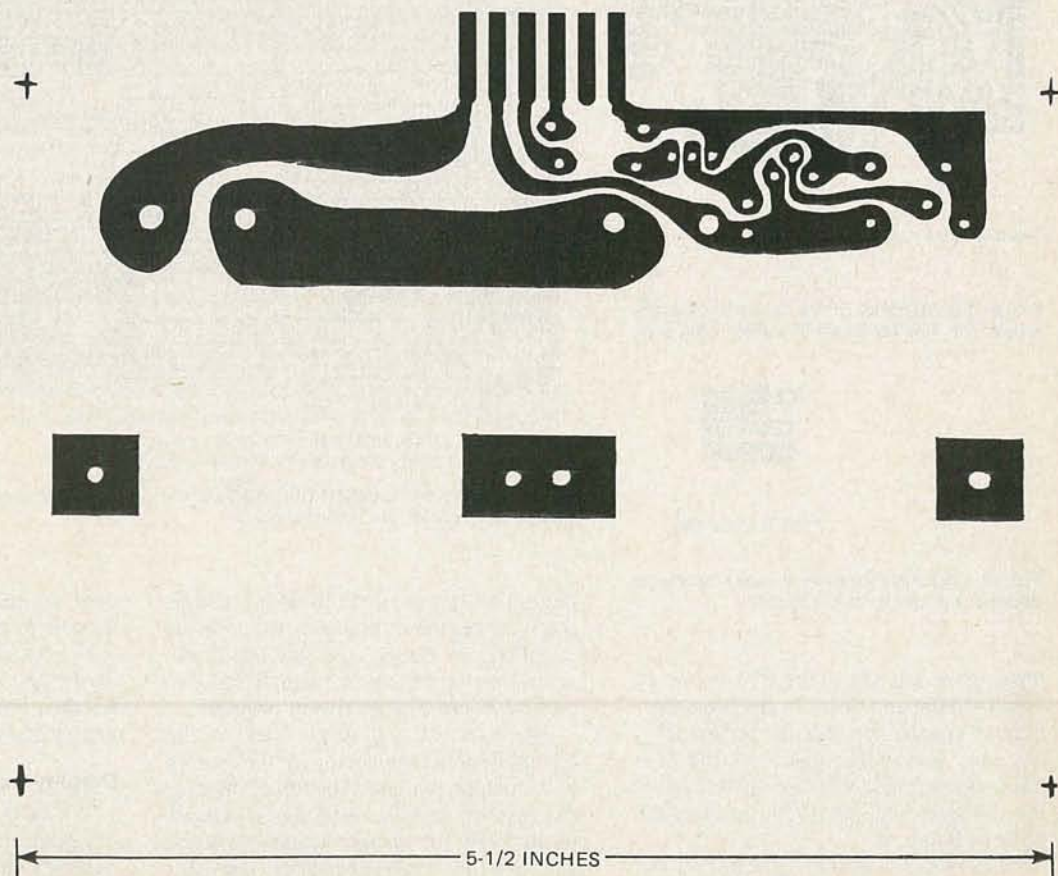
MOST OF BOARD 3 is taken up by battery holders. The foil pattern for that board is shown here.
